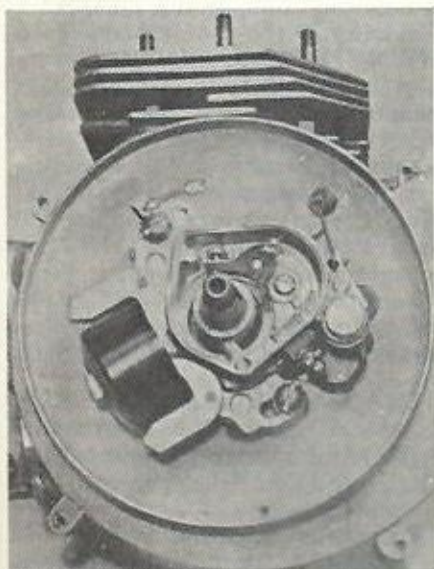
Timing ignition on models 175, 270, 271, 370, 371 and 1670. Punch mark on stator near upper mounting screw should align with mark on stator backing plate.
